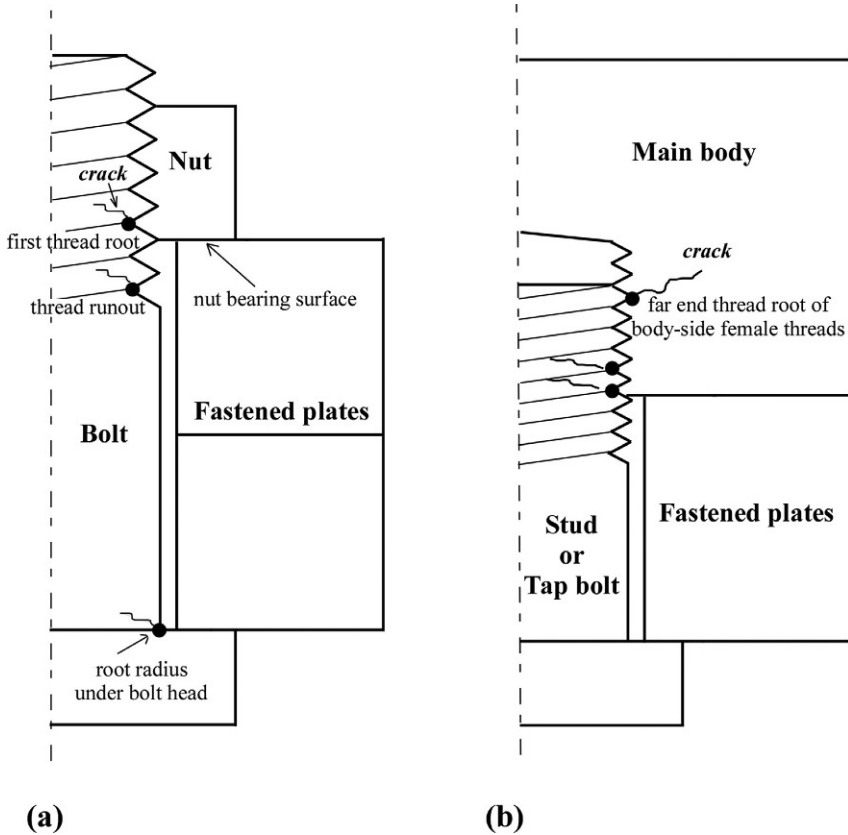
Occurrence locations of rupture and failure in threaded fasteners. (A) Bolt-nut connection and (B) body-side engaged threads.
